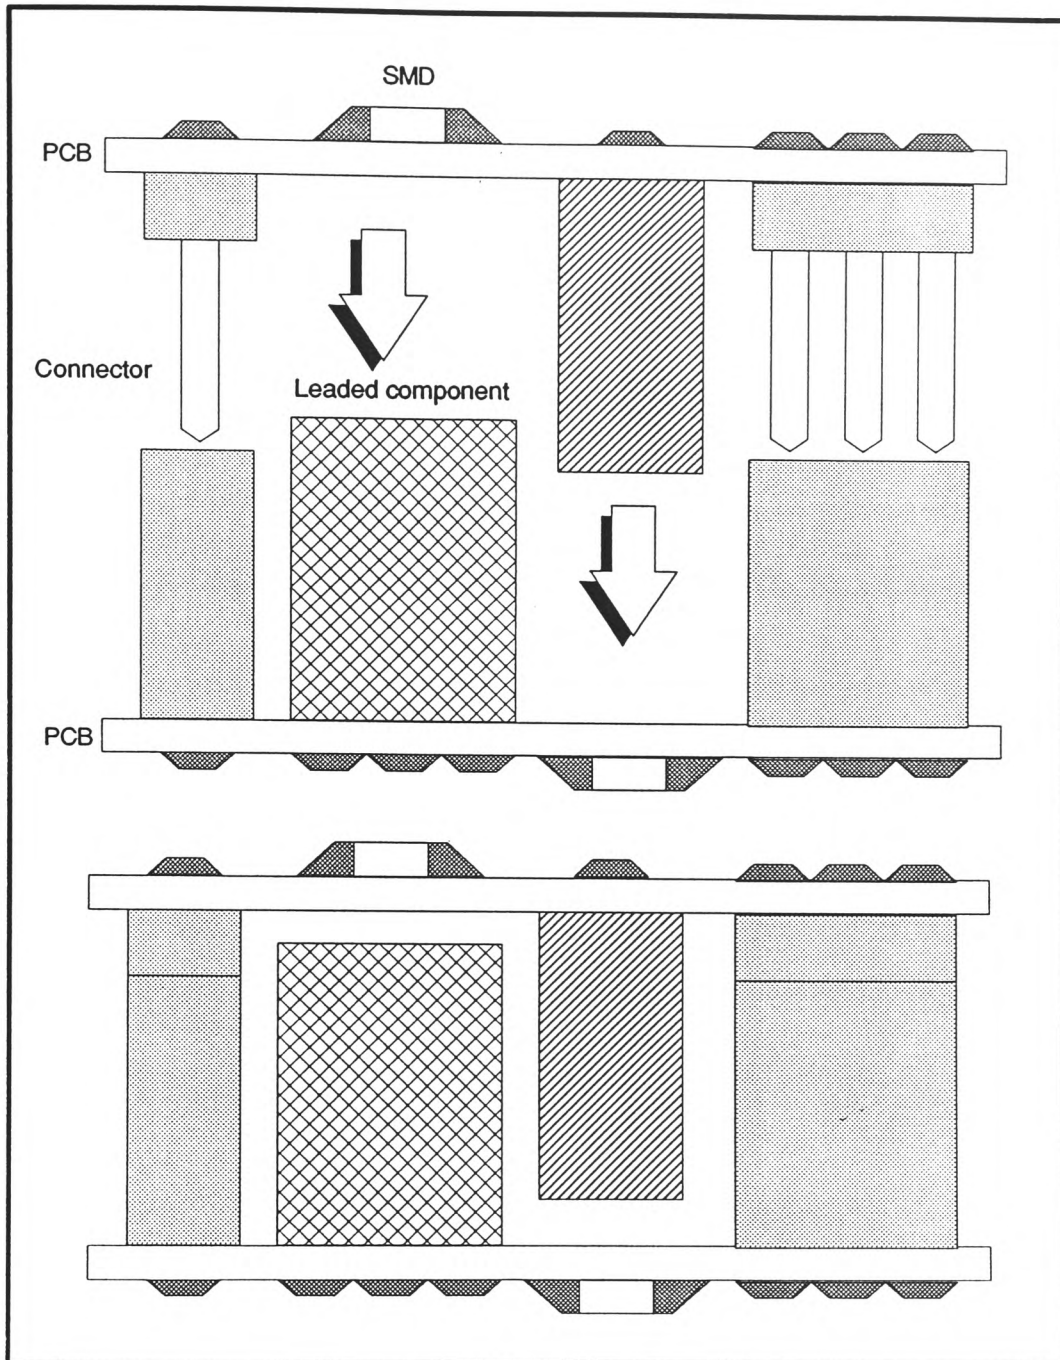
The topological assembly concept used to achieve high assembly density with mixed technology boards
